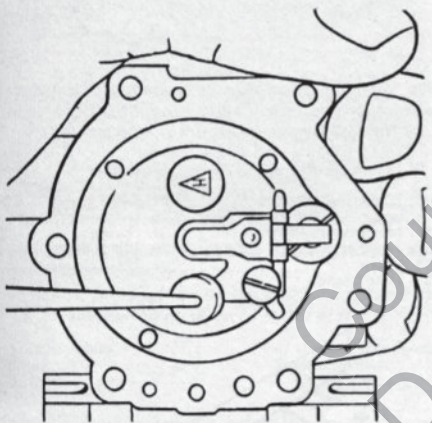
A punch can be used to remove welch plugs as shown after carefully drilling a small hole in plug.
